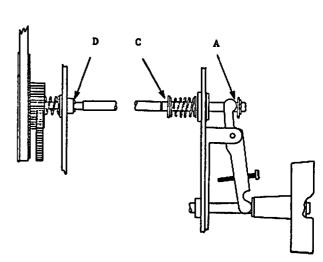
SPROCKET ADJUSTMENT (ENGAGED)
